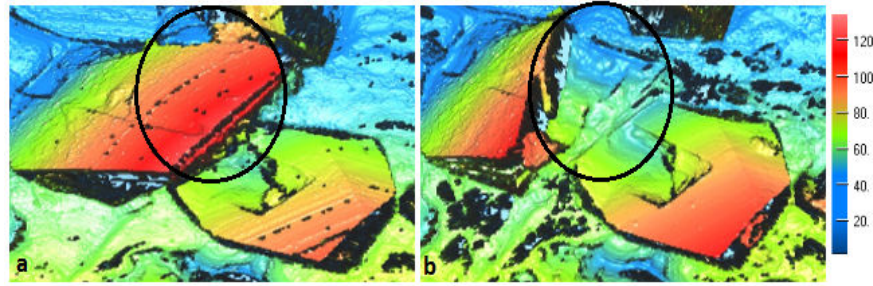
Fracture On a Single Grit; a) Initial State, b) After 150 Passes
